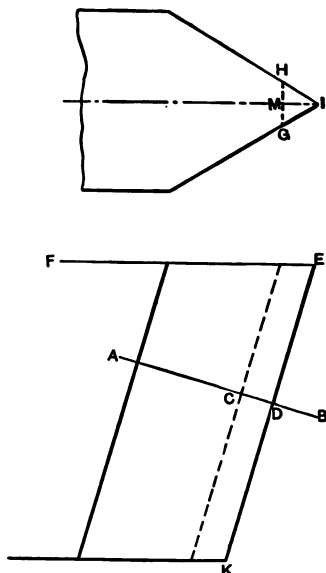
U. S. Standard Thread Tool before Grinding Flat
